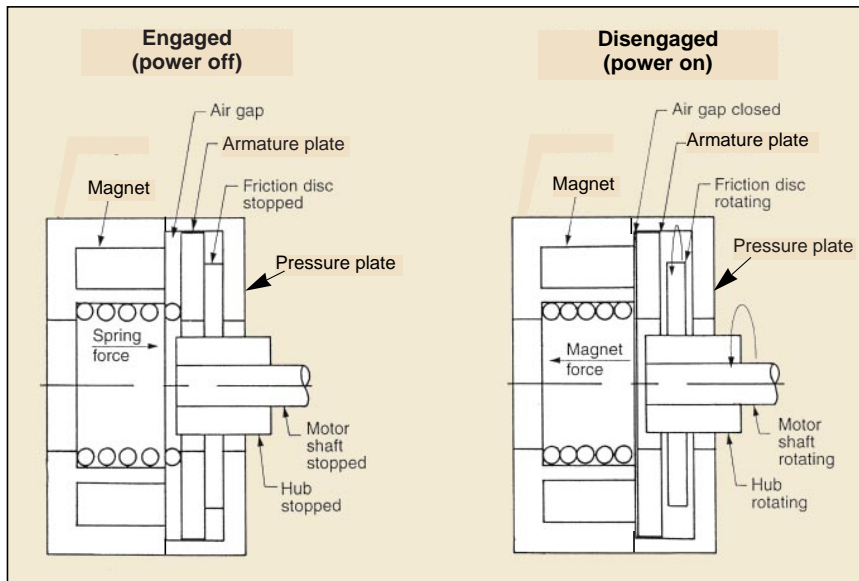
Electrical power causes the magnet in a spring-set brake to pull an armature plate away from the friction disc so it is free to move. When power is interrupted, the spring forces the armature plate into clamping contact with the friction disc and pressure plate, thereby applying the brake.
